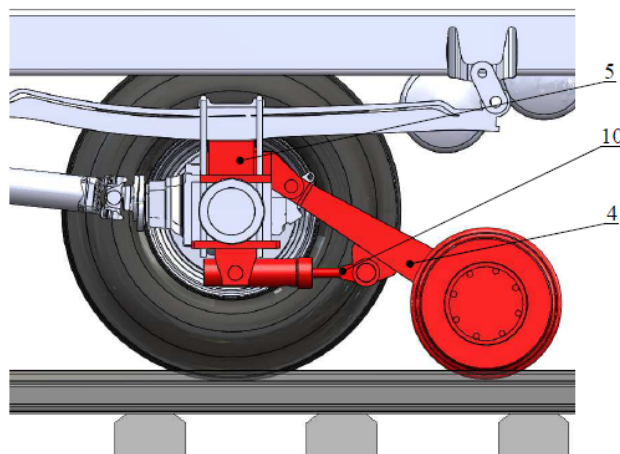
Rail running gear system with single axles – view of the rear drive bridge.
